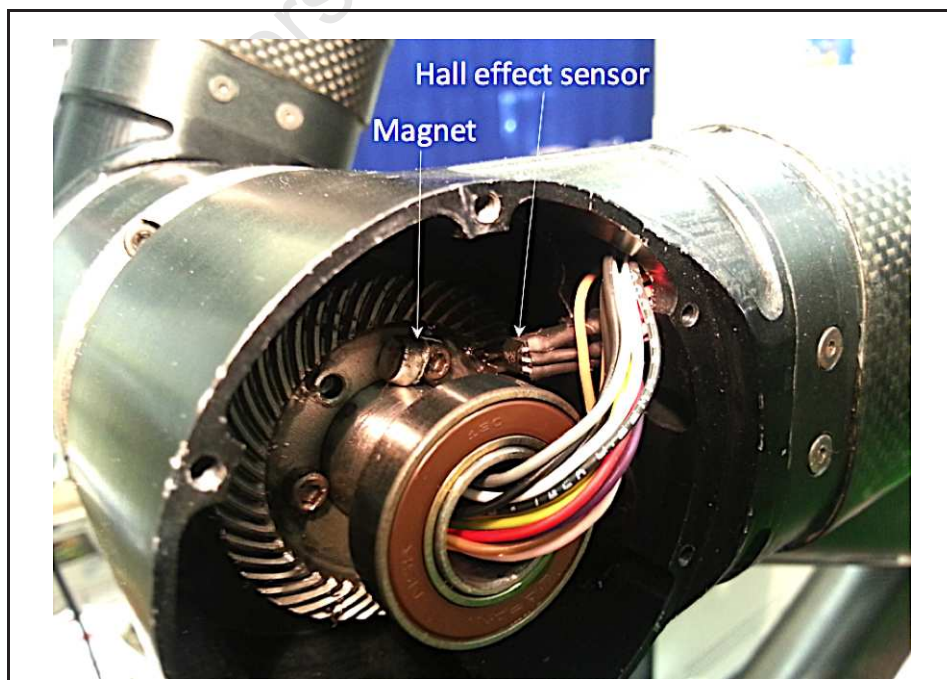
Magnet and hall effect sensor located on the sixth motor gear assembly.
